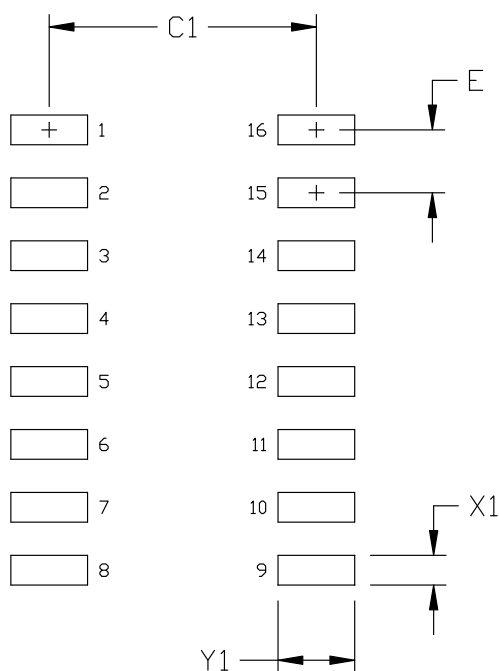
SOIC16 PCB Land Pattern Drawing
